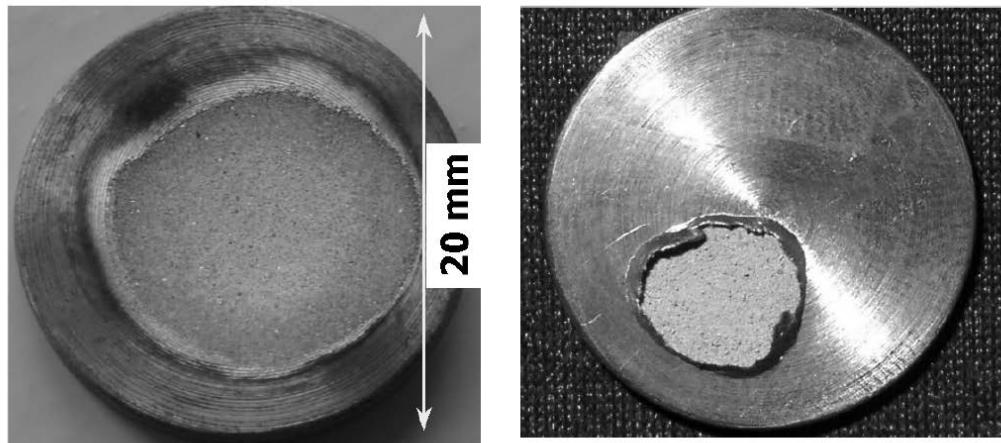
Front (left) and rear (right) specimen surfaces upon a one-pass electron beam treatment
